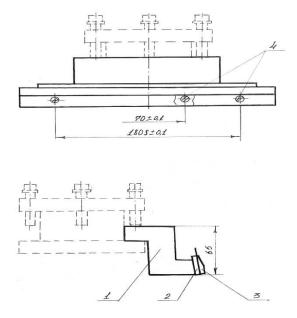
Knife holder: 1-case; 2 – body plate; 3 – consignment plate; 4 - screws.
